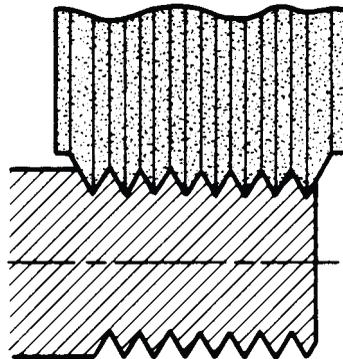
Multi-ribbed Type of Thread-grinding Wheel
